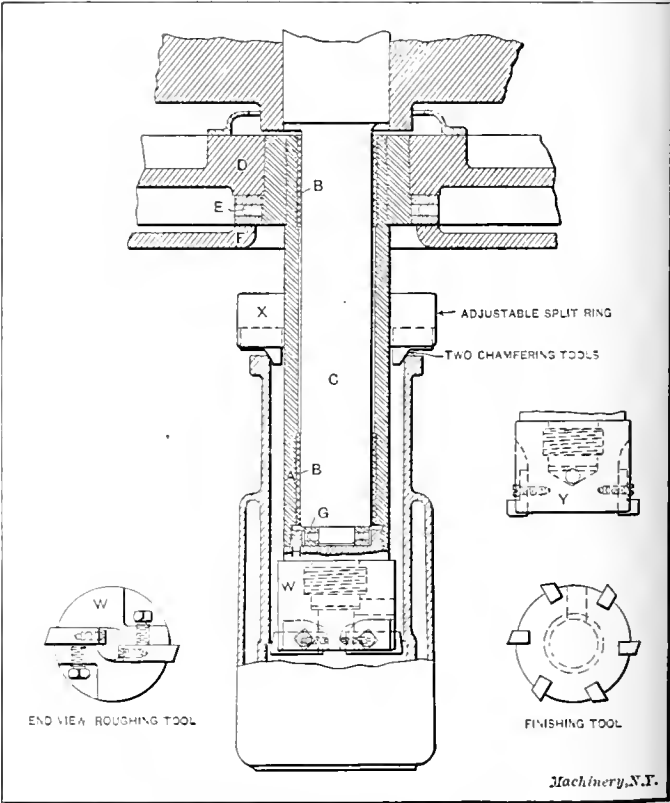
Sectional View of Spindle Sleeve on Stationary Stem; also shows Cutter Heads used for Cylinder Boring
